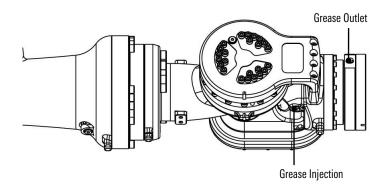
Replace the lubricating grease of J6 axis reducer and gear case
